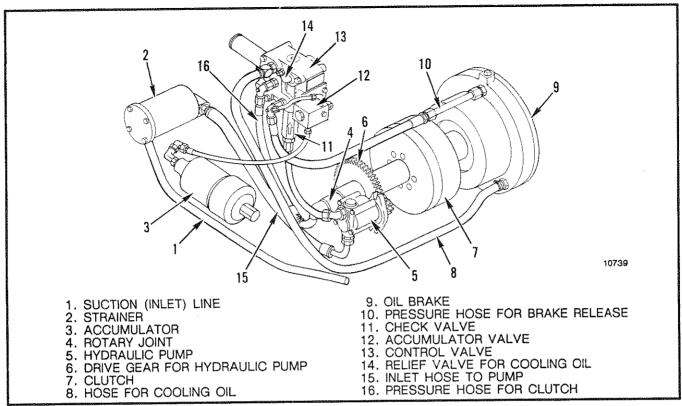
HYDRAULIC SYSTEM, W3.5B WINCH
